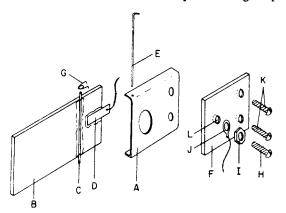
Exploded view of the glass response key. Refer to text for explanation of letter symbols.
